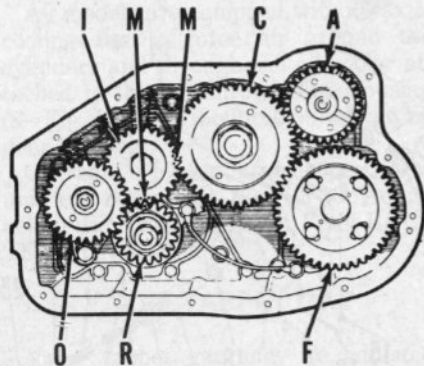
View of timing gears on Models 834 and L54. Refer to Fig. L3-15 for identification except for: F. Fuel injection pump drive gear.
